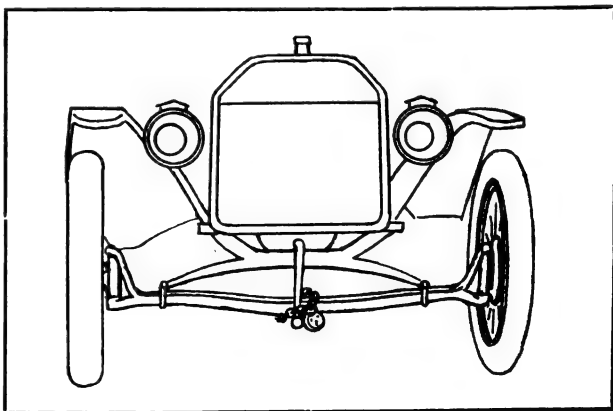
Starting Crank Chained to Front Axle to Prevent Theft or Use.
